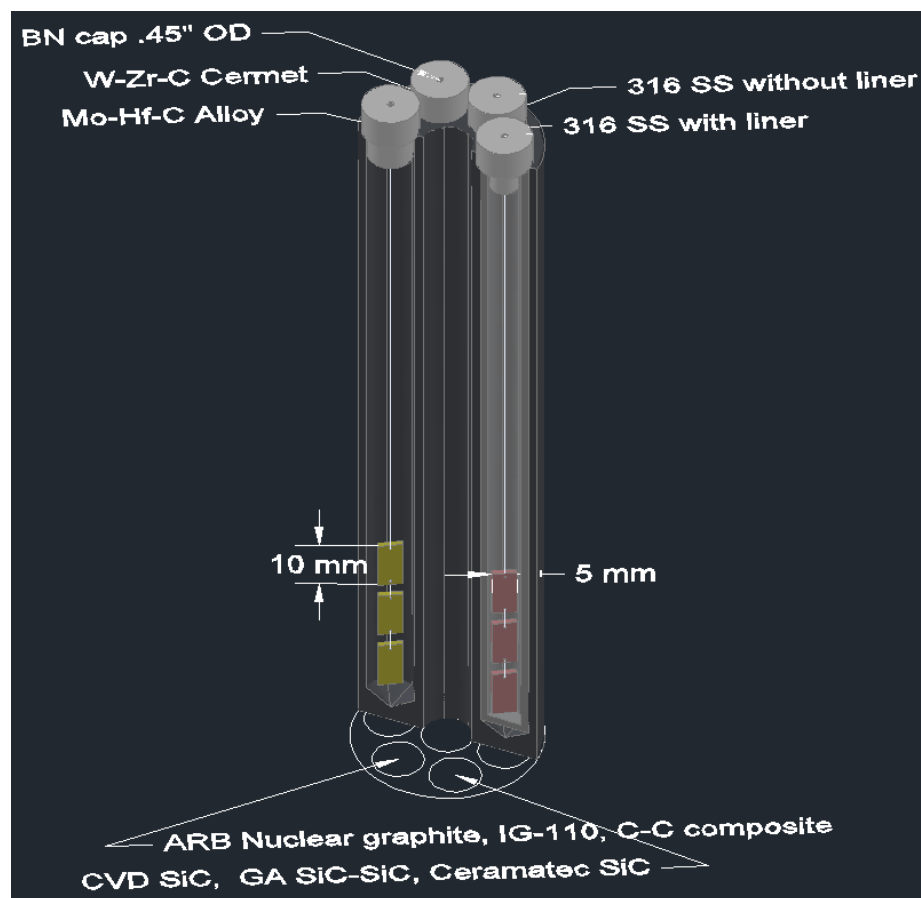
CAD drawing of corrosion crucible and sample locations. Metallic samples will be suspended with wire, whereas ceramic samples will be placed in the crucible freely. A total of about 150g of FLiBe per crucible is required.
